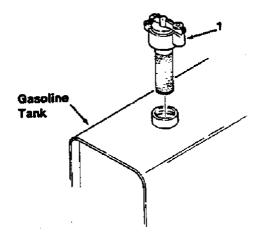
PROTECTOSEAL FUEL TANK CAP KIT
